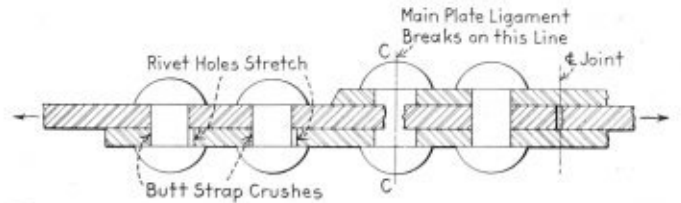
Failure of Double Butt Strap Joint Through Third Row of Rivets; Failure (T + Crb)
